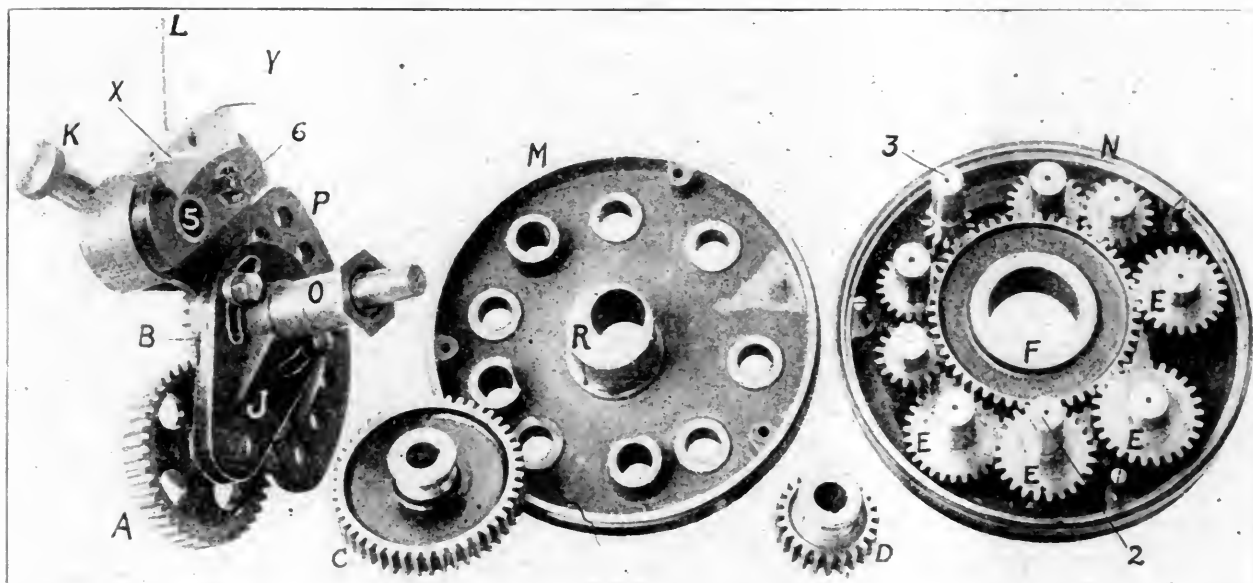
INTERNAL VIEW OF FEEDING ATTACHMENT, SHOWING ARRANGEMENT OF THE COMMON INTERMEDIATE GEAR AND MULTI-SPEED PINIONS.
